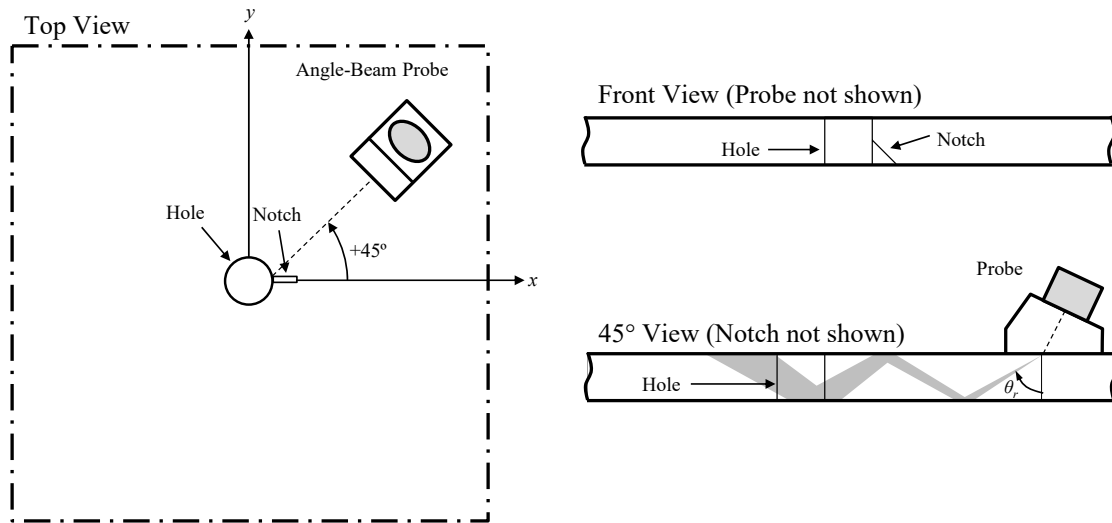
Sketch of the aluminum plate specimen showing the through-hole, back-surface corner notch, and angle-beam probe (not to scale).
